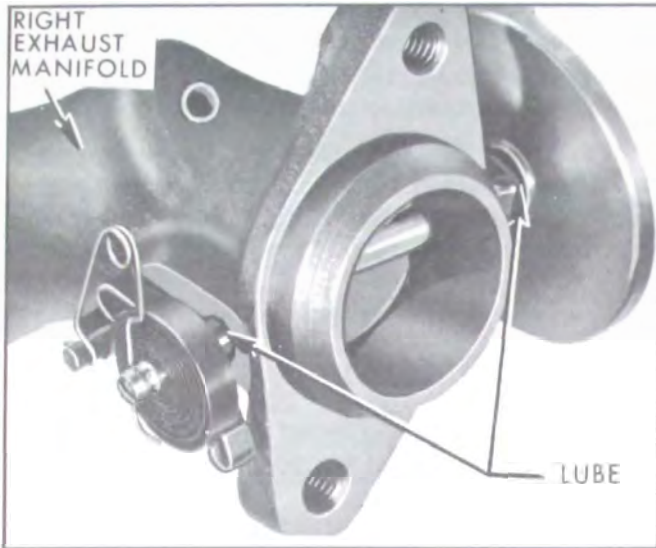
Exhaust Manifold Valve V-6 Engine
